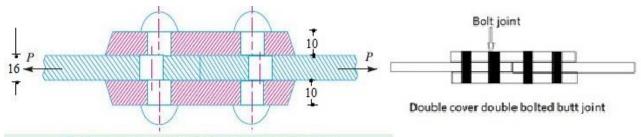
Shearing off a rivet in double cover butt joint.
